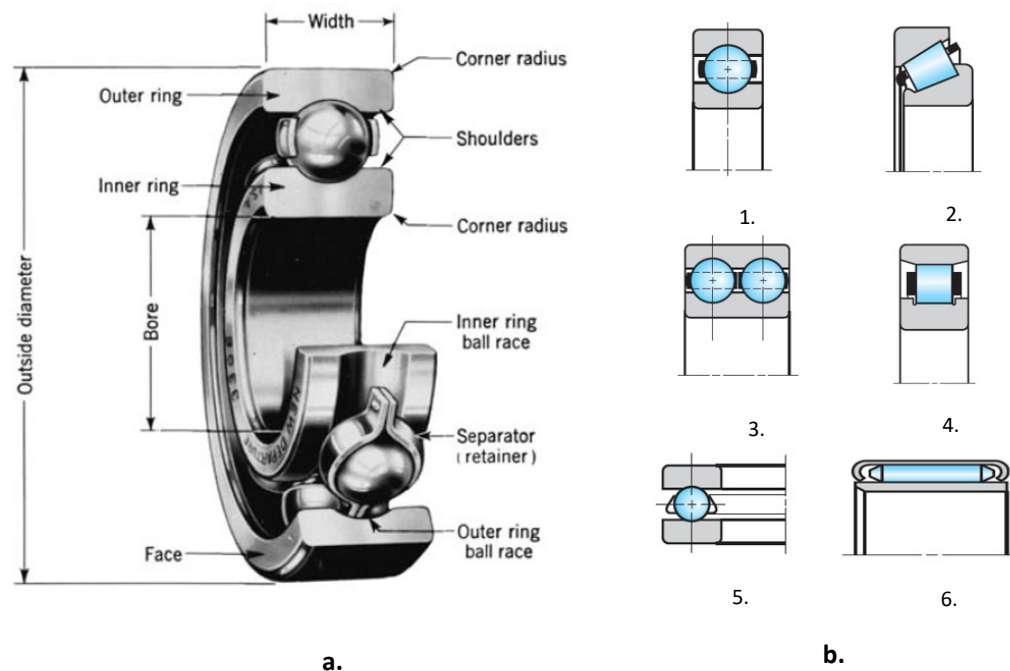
Rolling bearing schematic configurations. a) Elements assembled in a typical deep groove bearing. b) Different standard bearing types used according to the load requirements: 1. Deep groove single balls, 2. Steep tapered angle roller, 3. Double row balls, 4. Straight roller, 5. Pure thrust roller ball, 6. Needle roller. Adapted from [17].
